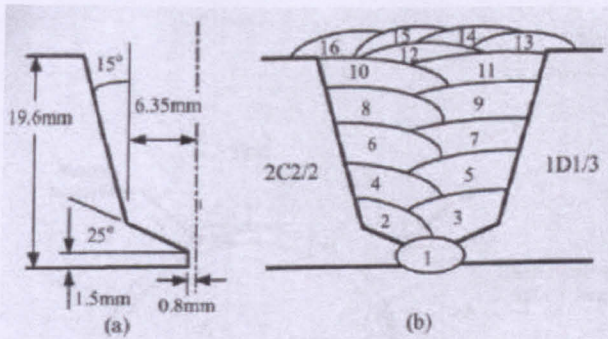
Test component geometry showing girth weld [85]
